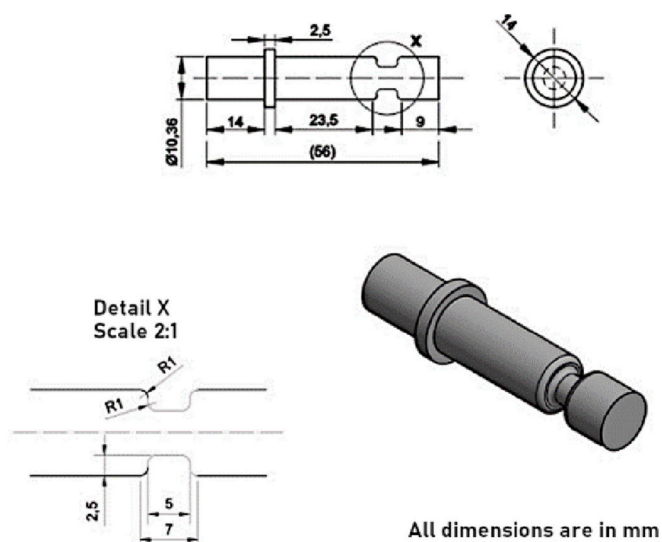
Autocad drawing of the connector made of graphite so that it can be manufactured in any company or parts machining laboratory.
